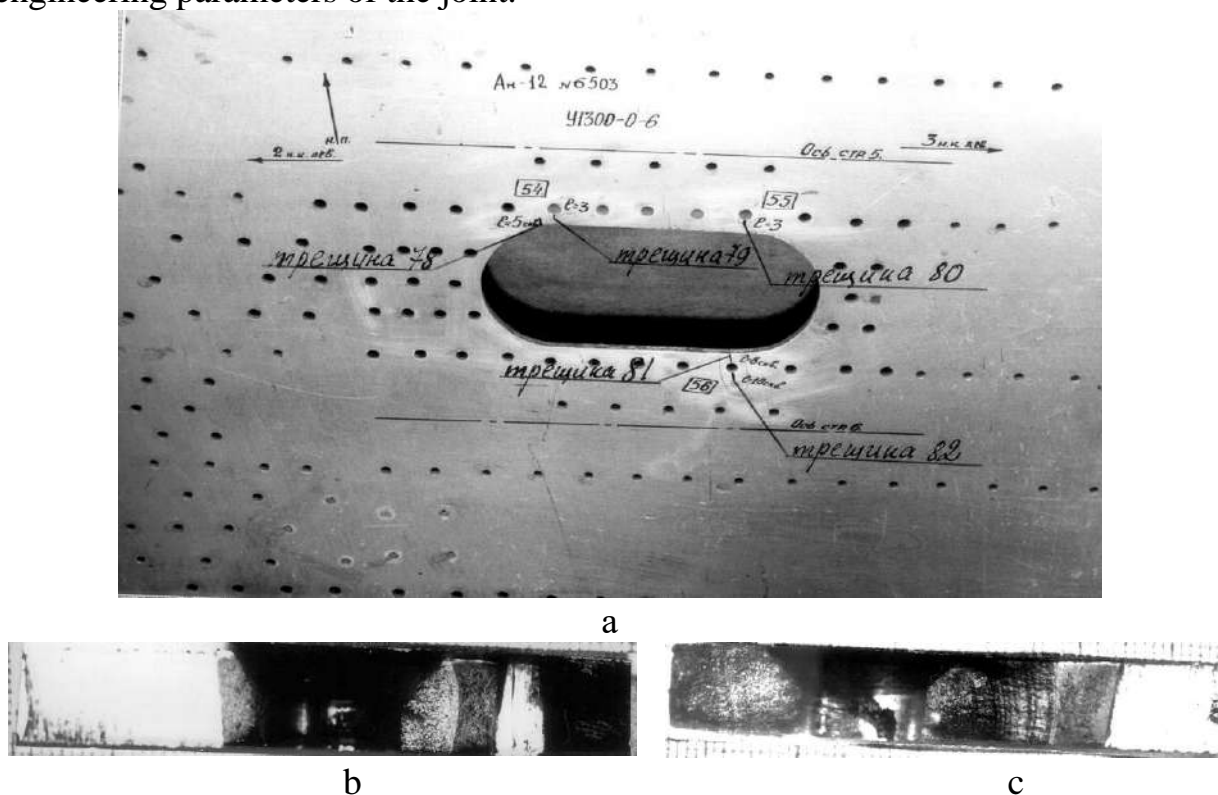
Damage to AN-12 aircraft wing panel structure in zone of countersunk bolted joint installation: a) – wing panel appearance; b, c) – damaged joint area appearance
